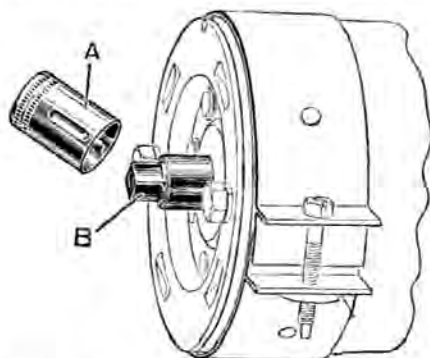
SQUARED END OF STARTER SHAFT WITH COVER REMOVED
